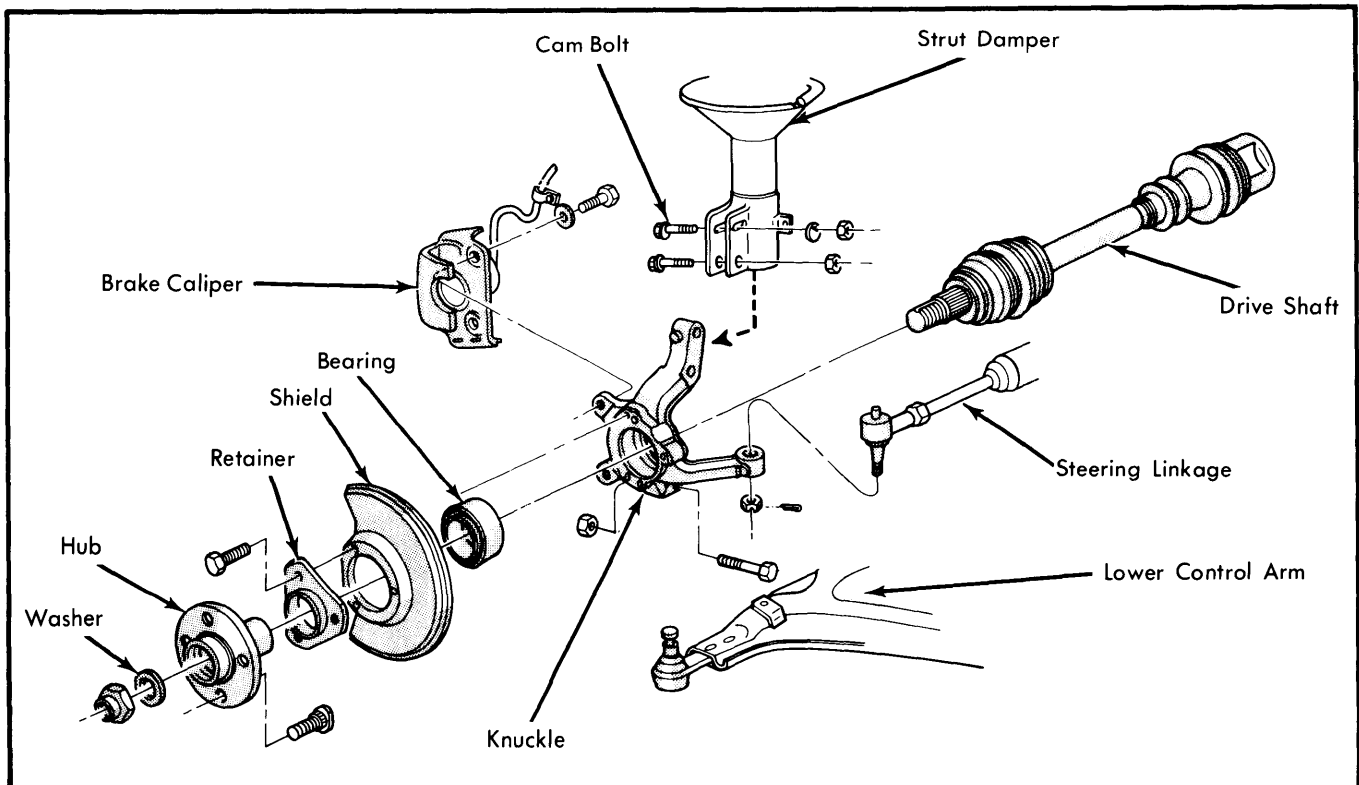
Strut Damper Assembly (Omni & Horizon)
